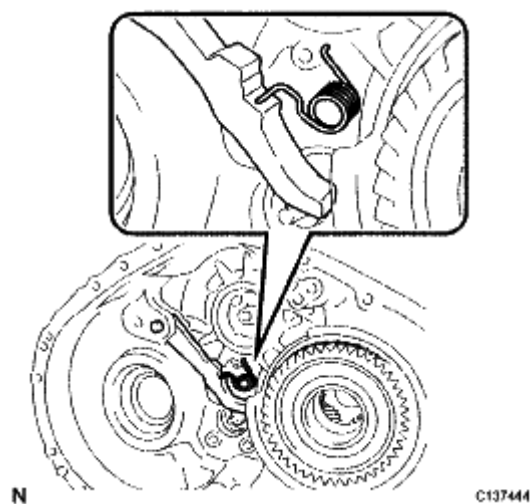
Installing Torsion Spring To Parking Lock Pawl
